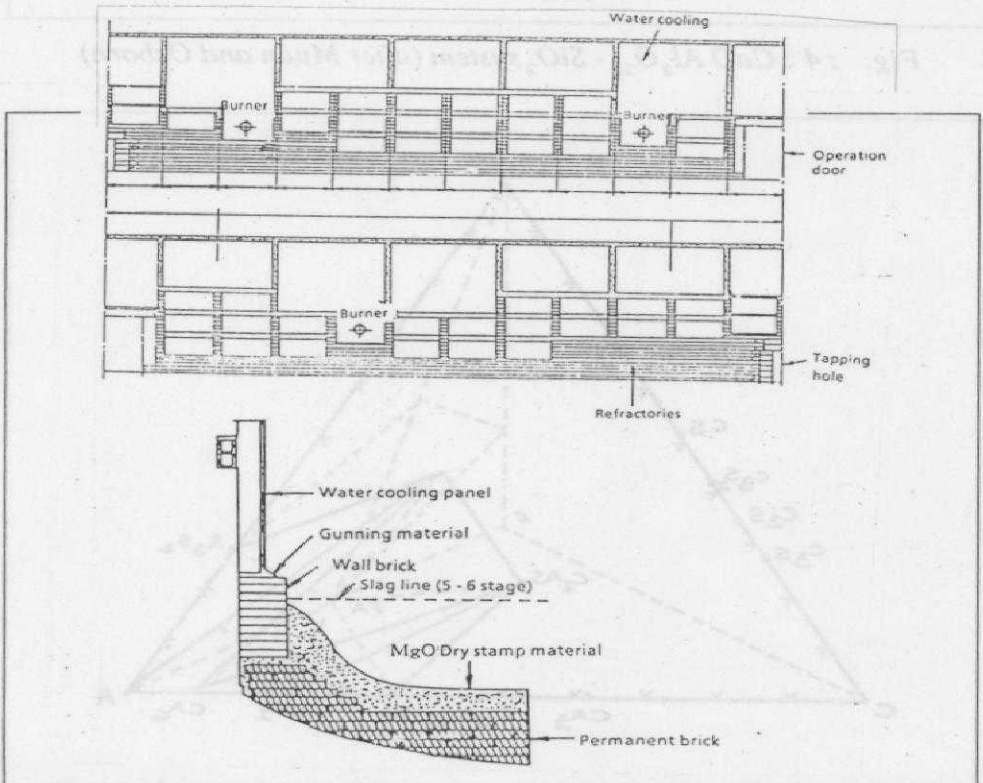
Water cooling panel for wall (top); lining example (bottom)
